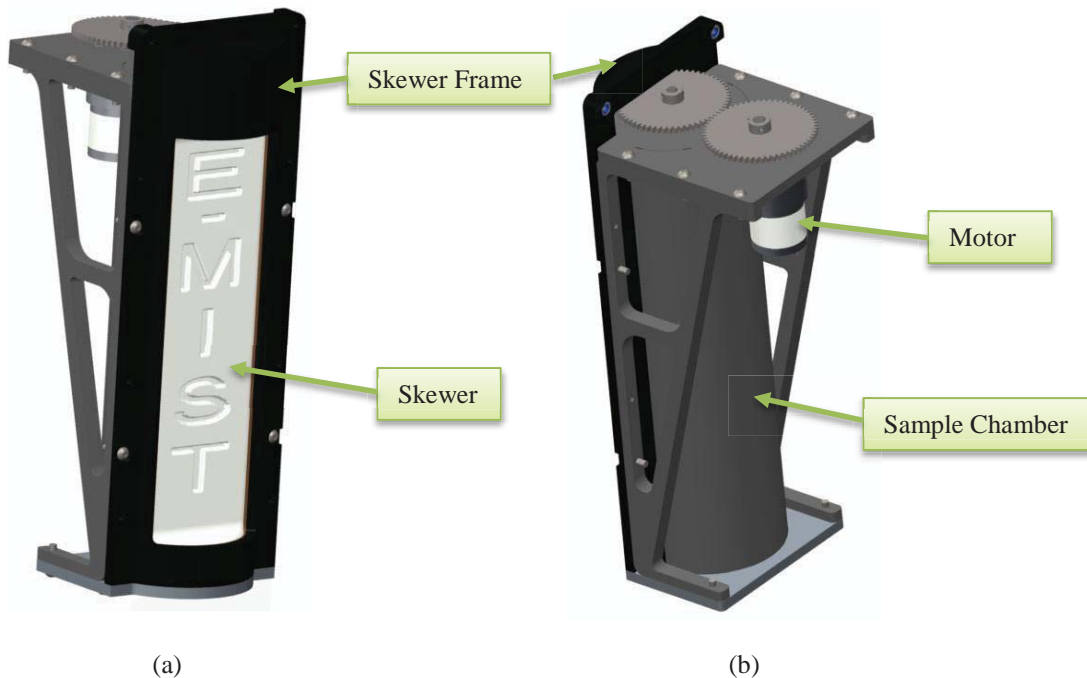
Front (a) and back (b) views of a skewer assembly⁵
